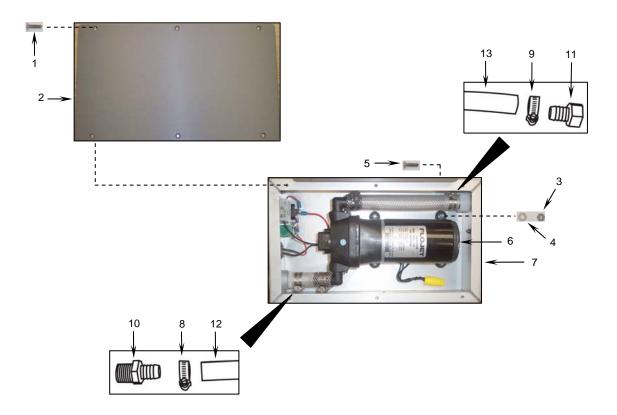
Removing the Sink Fill Pump Assembly Internal Straight Adapters.
